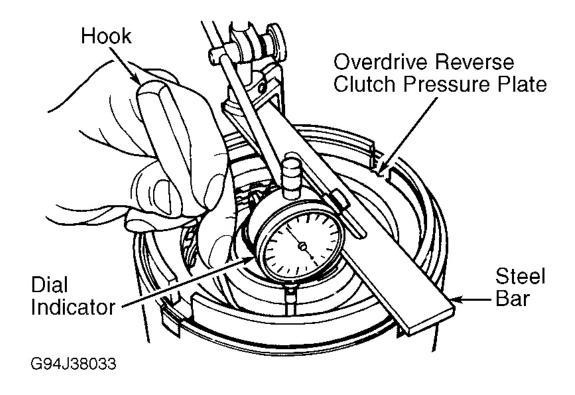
Checking Overdrive Clutch Clearance Courtesy of CHRYSLER CORP.
